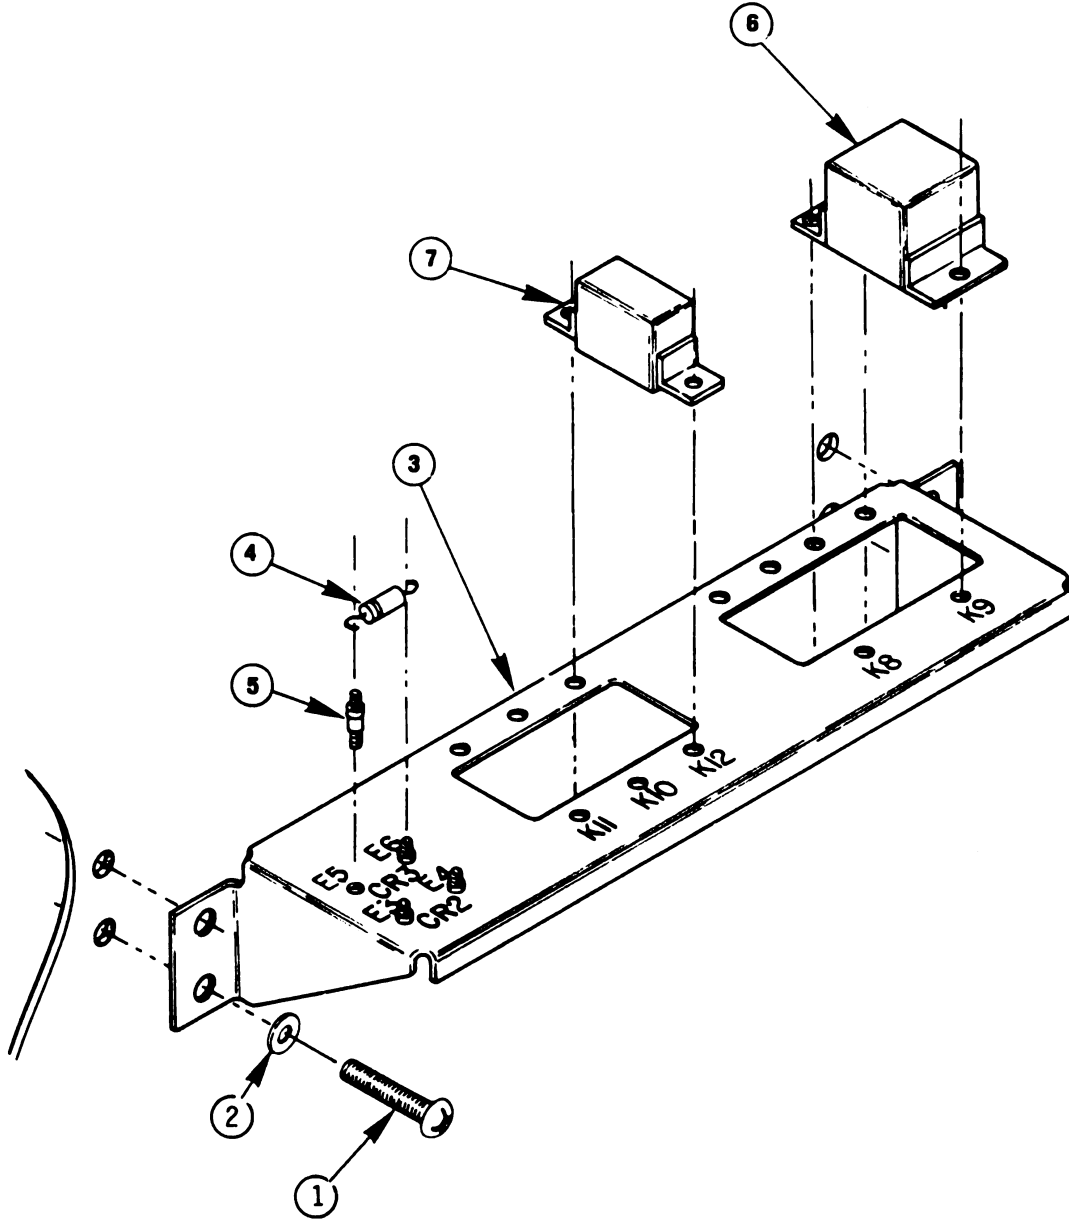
CHASSIS RELAY ASSEMBLY
